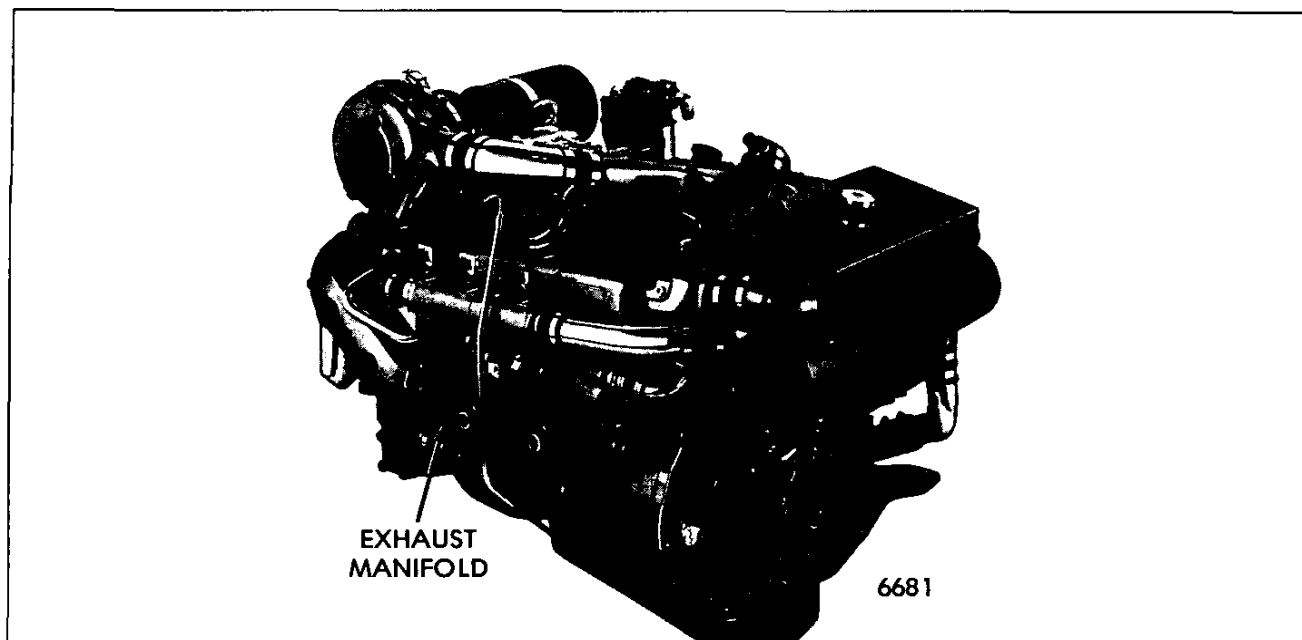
Typical Water-Cooled Exhaust Manifold Mounting (In-Line Engine)
